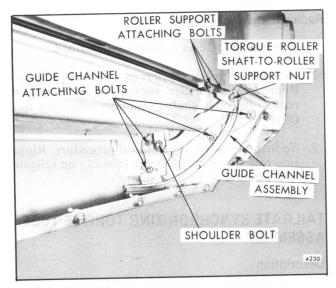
Tailgate Guide Channel Assembly - Right
